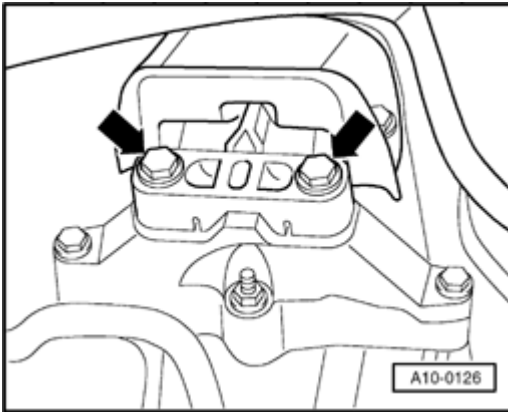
Identifying Transmission Side Of Assembly Mounting At Top Of Transmission Carrier
